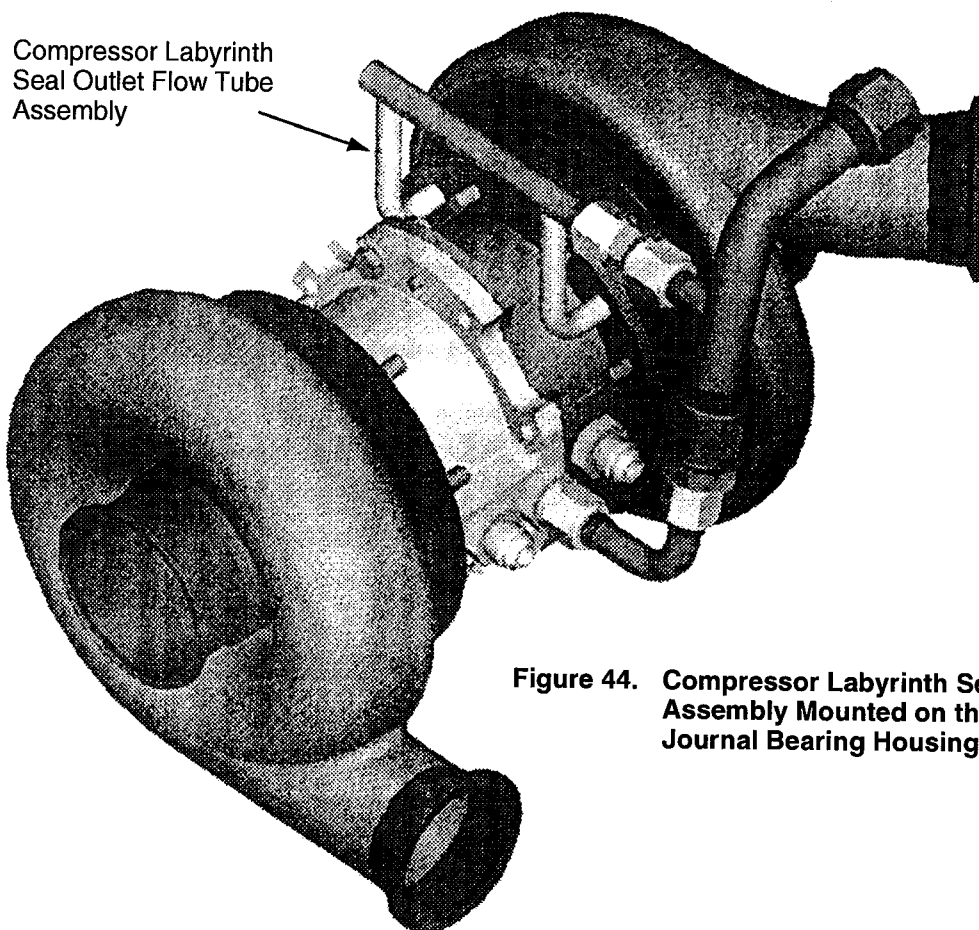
Compressor Labyrinth Seal Outlet Flow Tube Assembly Mounted on the Compressor Journal Bearing Housing
